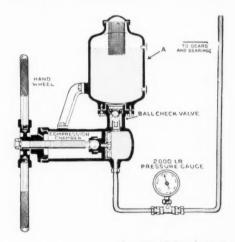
Showing the Farmer centralized system of lubrication. With this device, it is practicable to accomplish complete lubrication of both gears and bearings by a turn of the hand-wheel as shown above. At "A" is shown the oil or grease reservoir of any desired capacity.
